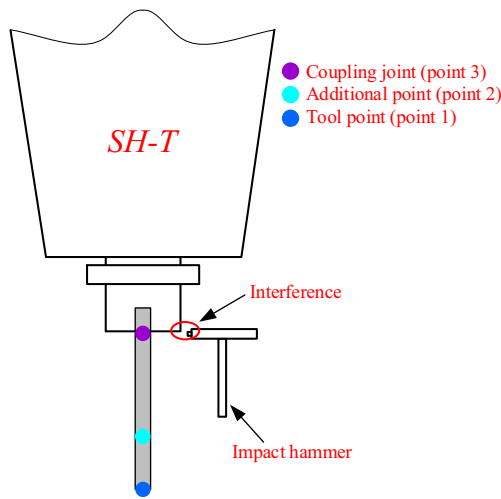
Hammer impact interference at coupling joint by Montevecchi’s method [24]
